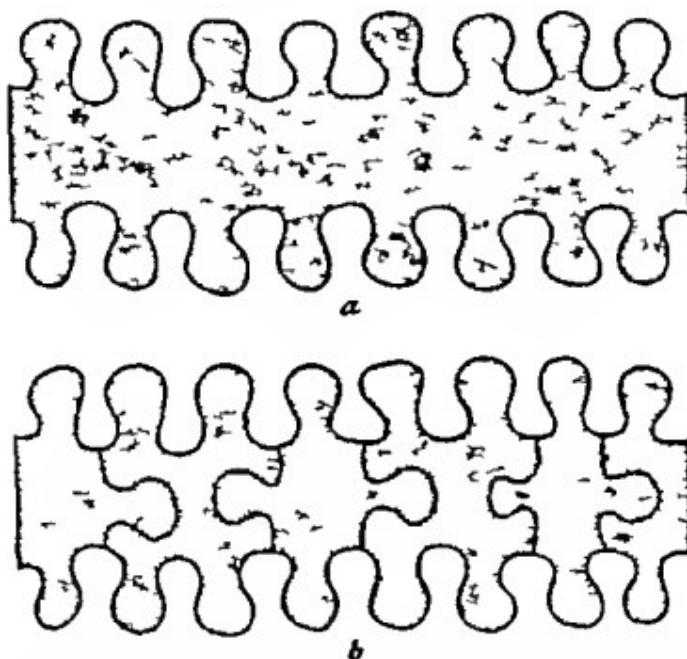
Method of cutting interlocking shapes for a jig-saw puzzle. The significance of (a) and (b) is explained in the text.
